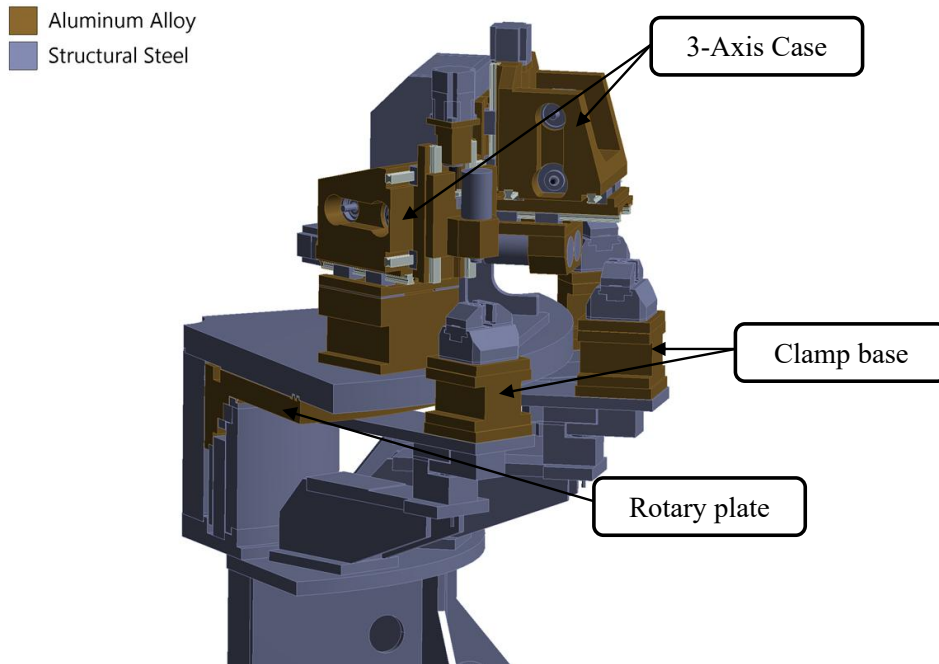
A section view of the machining center, which highlights the materials used for the components.
